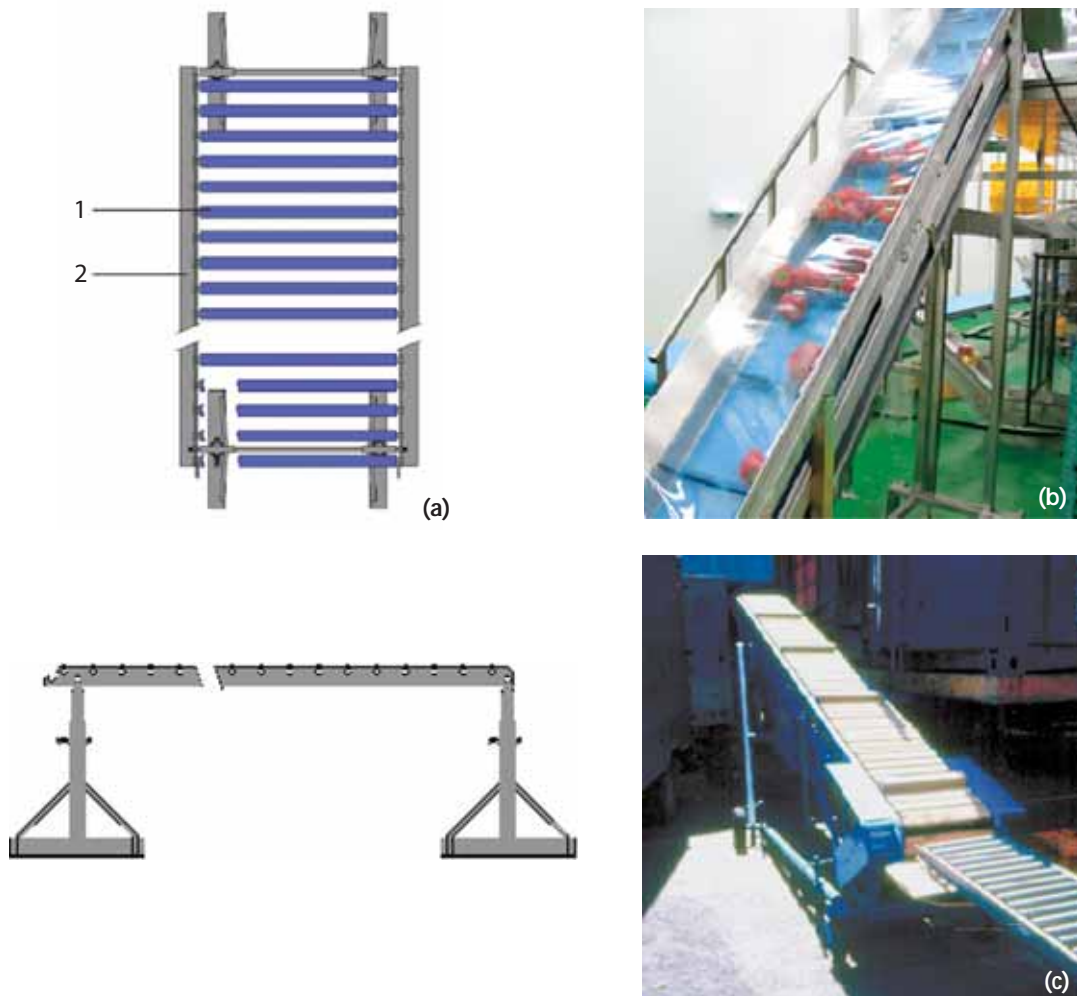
Conveyors: plan views of a gravity roller conveyor (a) with rollers (1) mounted on a steel frame (2) with adjustable legs (3); belt conveyor with cleats (b) for elevating sweet pepper; slat conveyor (c) with wooden slats and cleats mounted on chain loops for unloading banana crates
